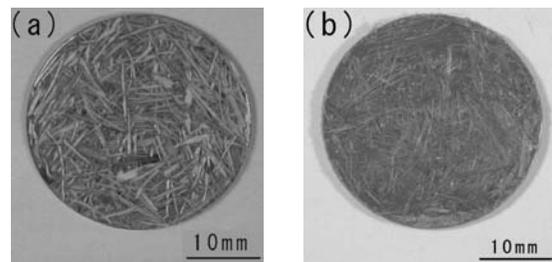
Press forming with the cylindrical mould, (a) Before moulding, (b) After moulding.
